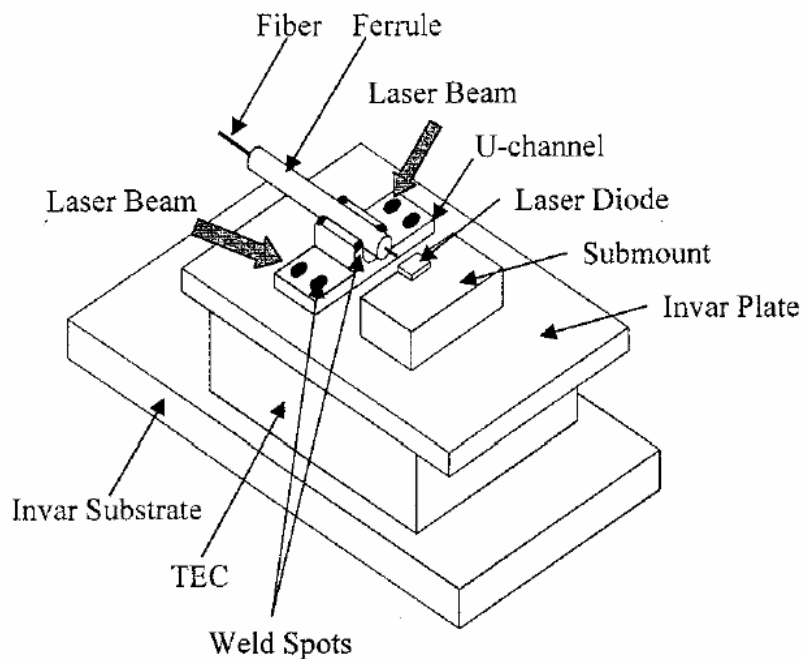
Laser diode assembly showing spot weld locations.
